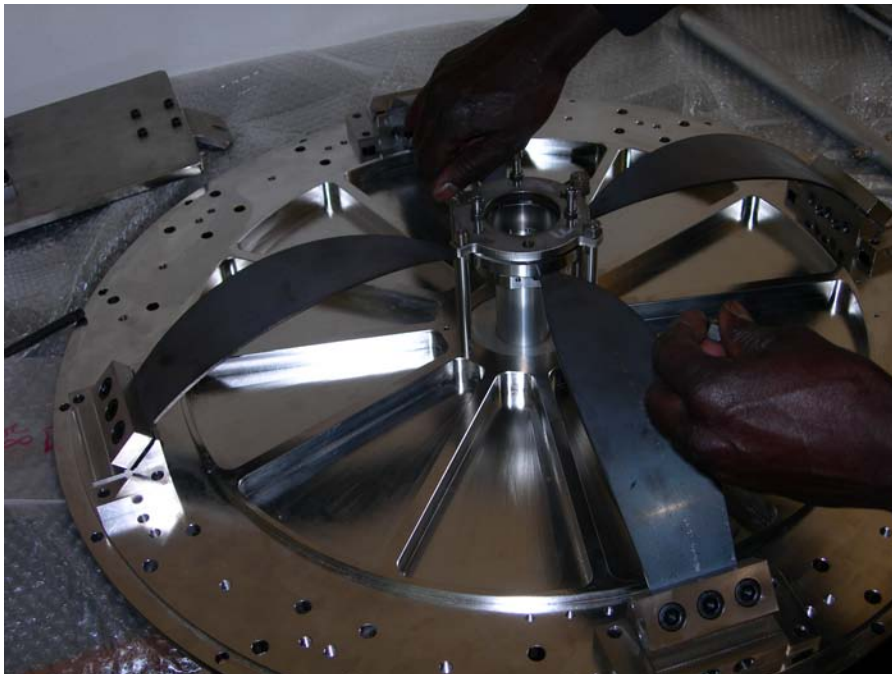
After all the required blades are mounted against the keystone (four in this case), the keystone end-stop ring is assembled.
